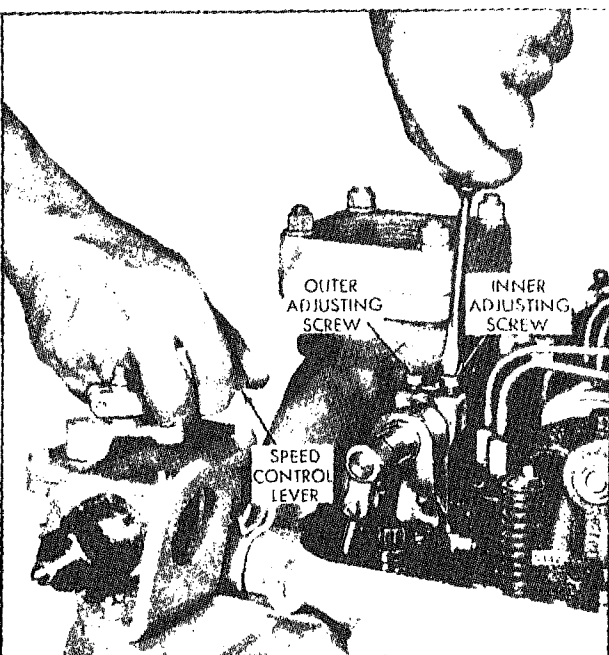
Positioning the Rear Injector Rack Control Lever
